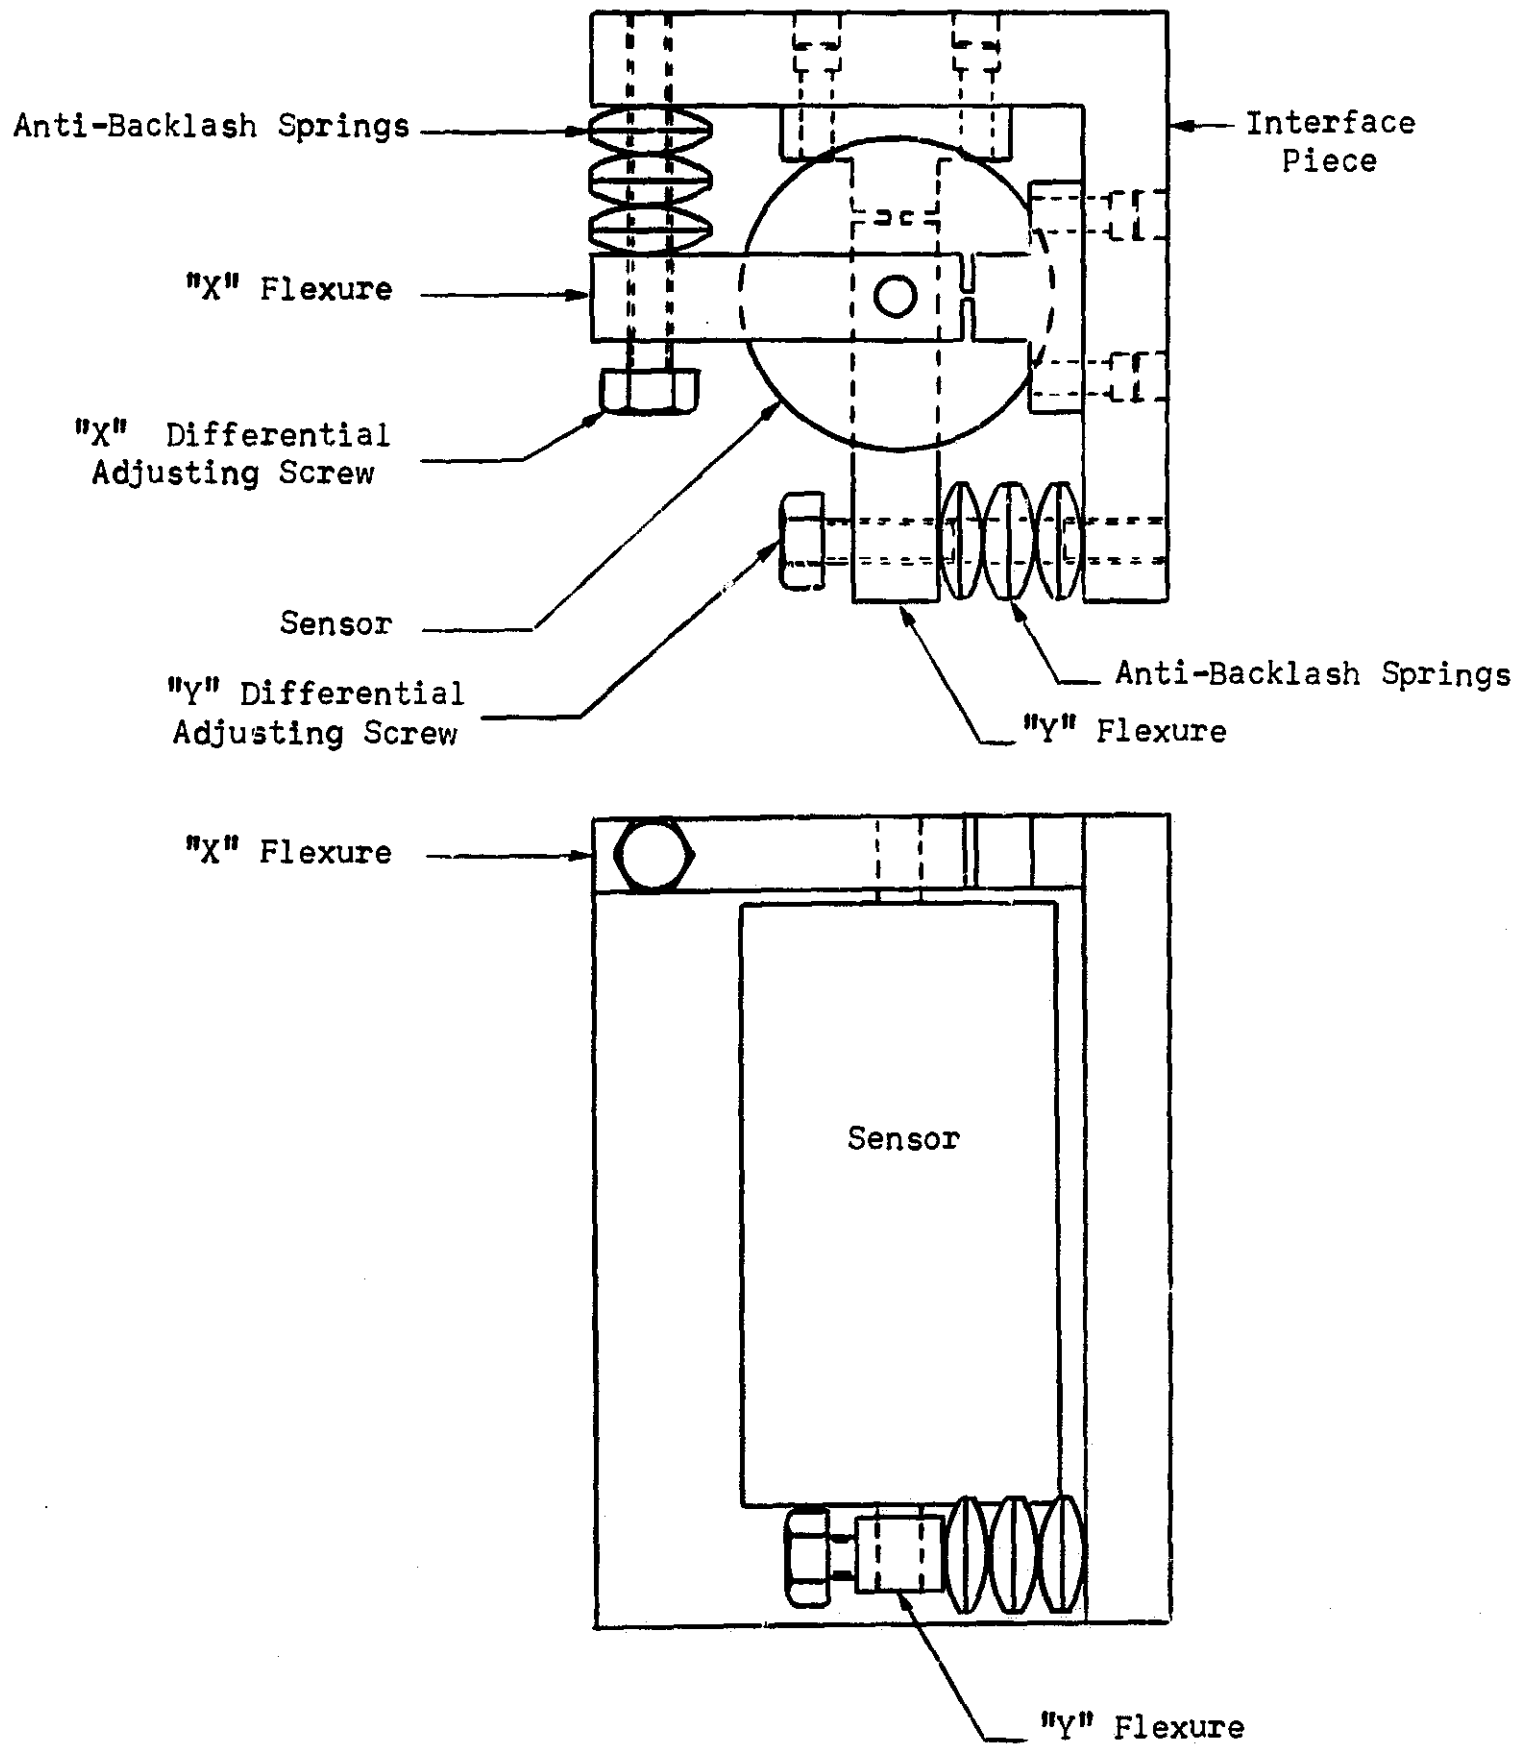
Adjustable Internal Clamp Perpendicular Flexure Adjustment Concept
